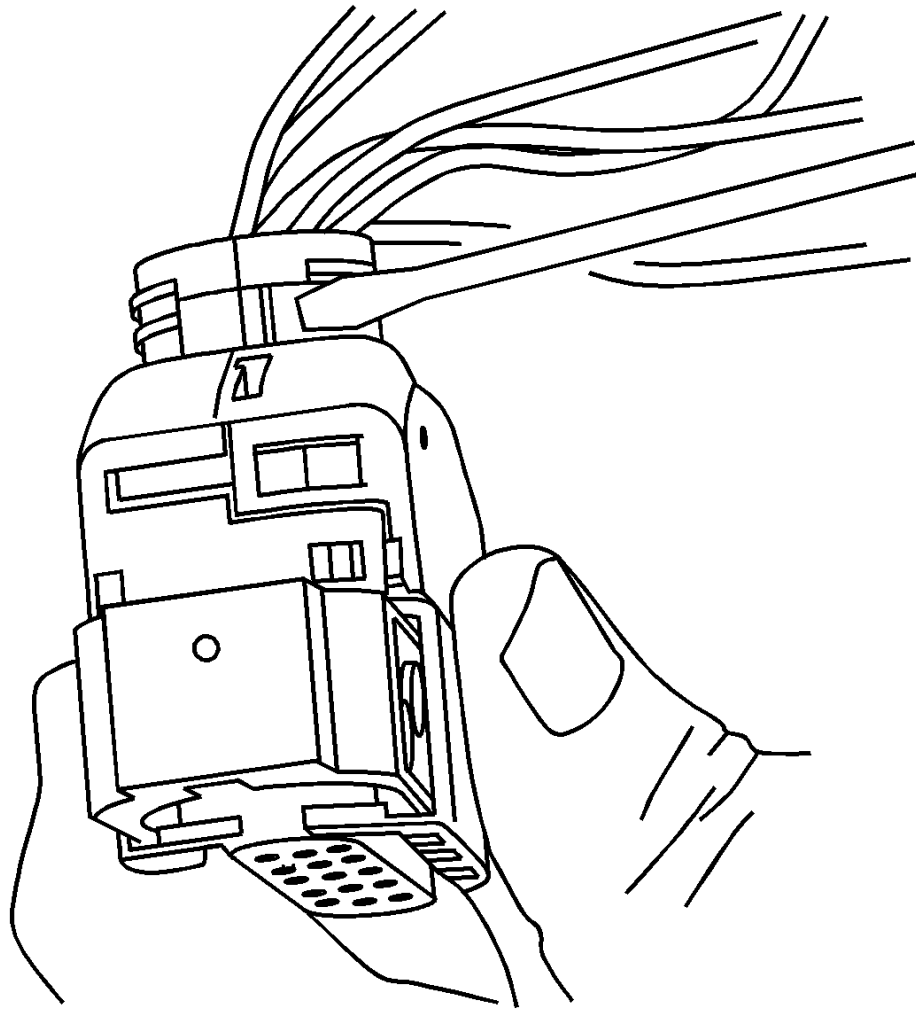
Identifying Upper Wire Dress Cover Locking Tab
